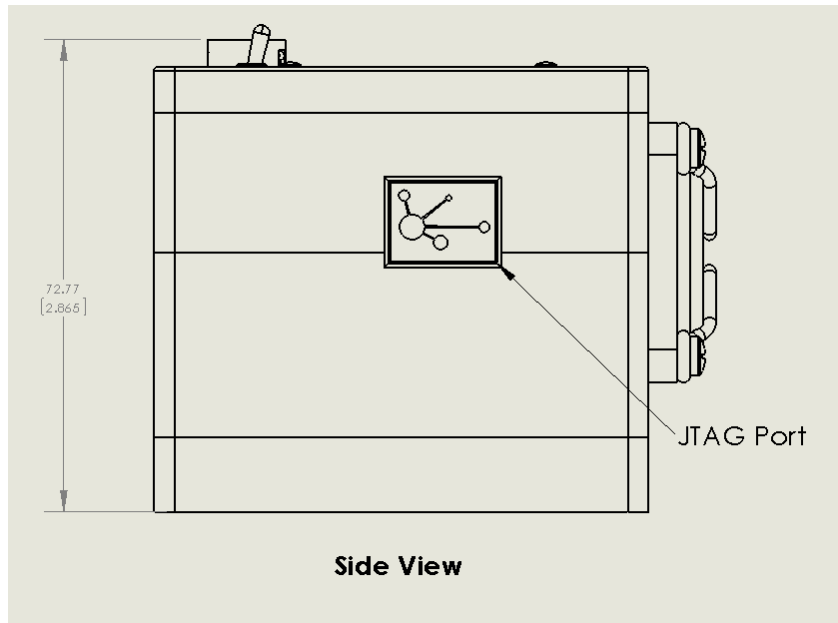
Dual Camera Link Body with ‘C’ Mount Lens Mount – Side View
